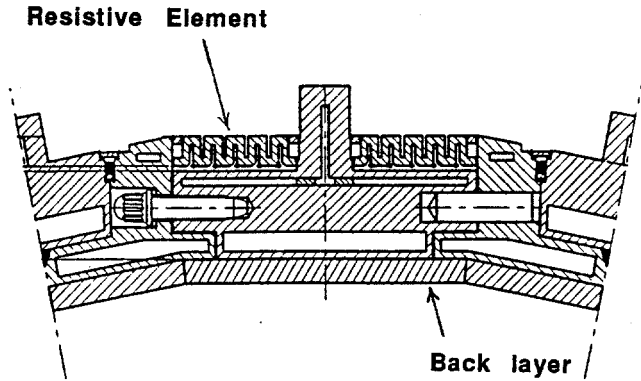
Detailed mechanical design of the inboard vacuum vessel.
